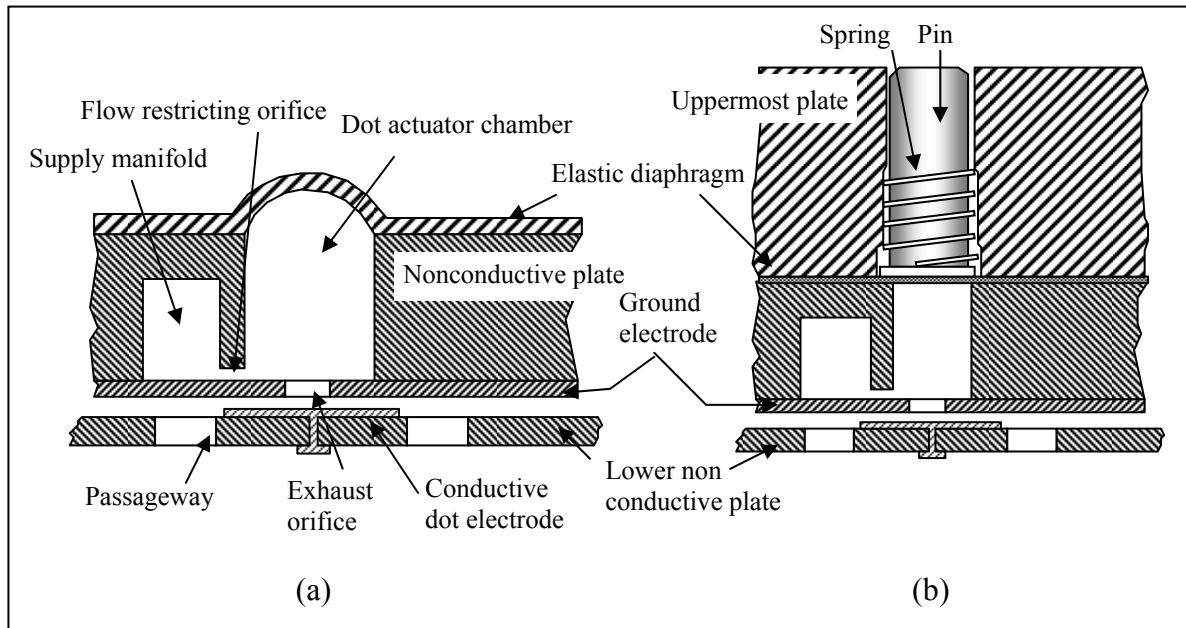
A tactile display utilized ER fluid (a) cross-sectional view and (b) a spring-load pin inside the uppermost plate.
